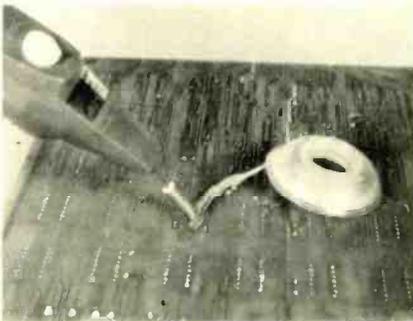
DESOLDERING BRAID soaks up excess solder when heat is applied.
